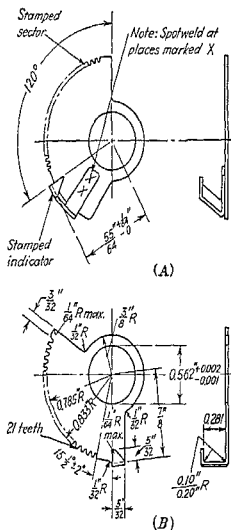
Gear sector: (A) former two-piece welded construction; (B) redesigned one-piece stamping. (White-Rodgers Electric Co.)
